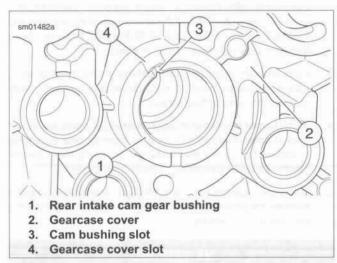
Rear Intake Cam Gear Bushing Installed in Gearcase Cover
